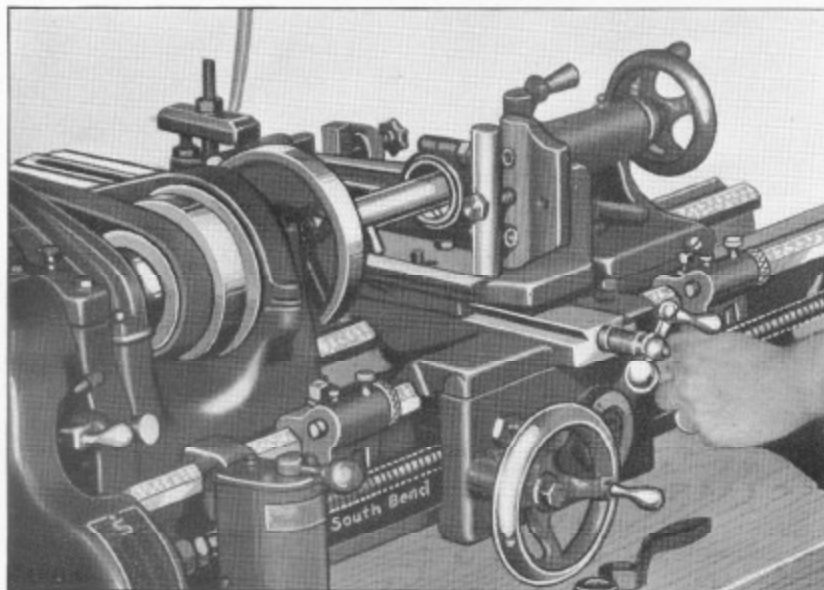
Lathe equipped with micrometer carriage stops on both sides of carriage for facing connecting rods to exact length.
